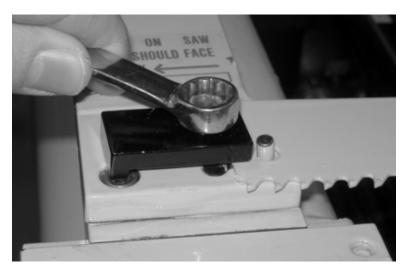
Loosen the blade fastening plate nut (7/16") and lift the plate to remove the blade.
